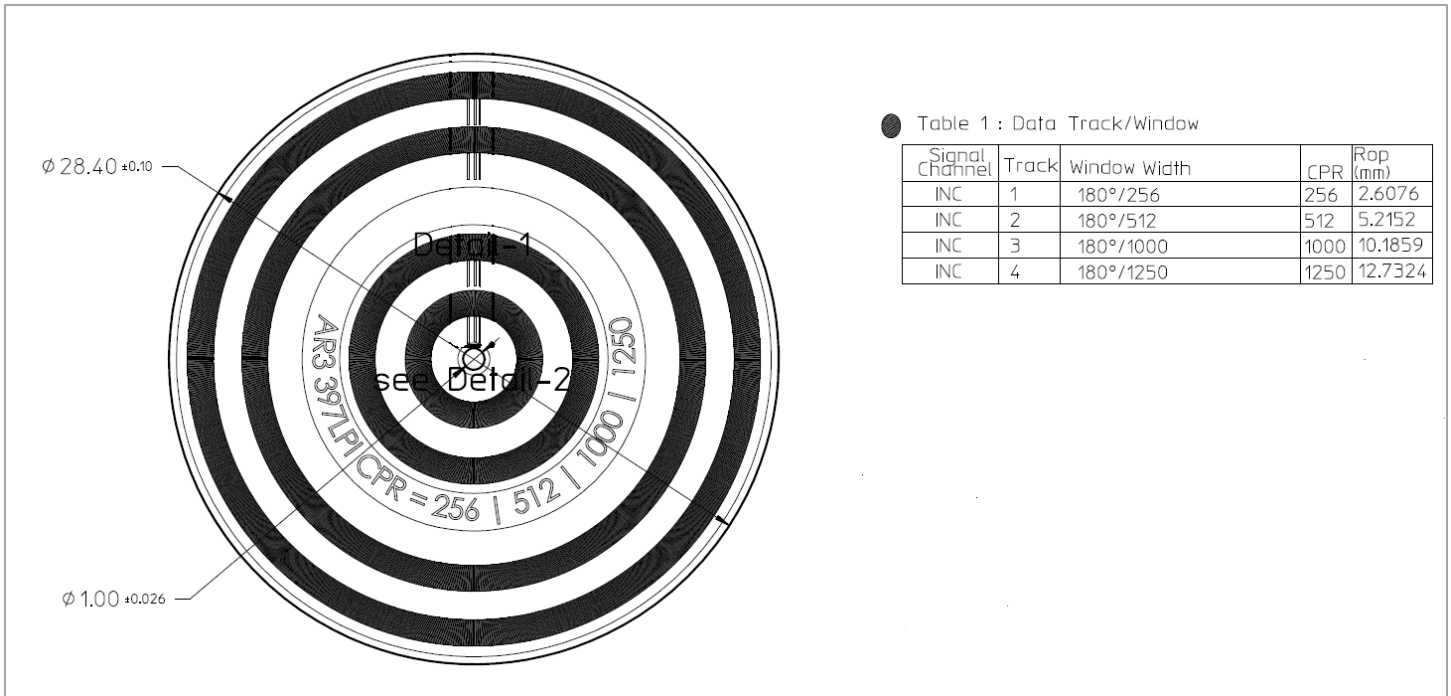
AEDR-9930 397 LPI 4-track (CPR) sample code wheel drawing
